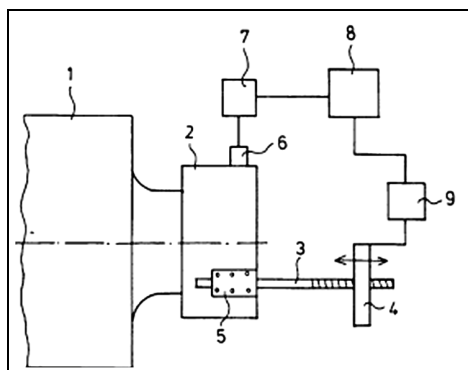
Tuned mass spring system. 1) roll, 2) bearing housing, 3) rod spring, 4) mass adjusted of its position, 5) fitting on the bearing housing, 6) vibration sensor and 7-9) control electronics (Karhunen 2005).
